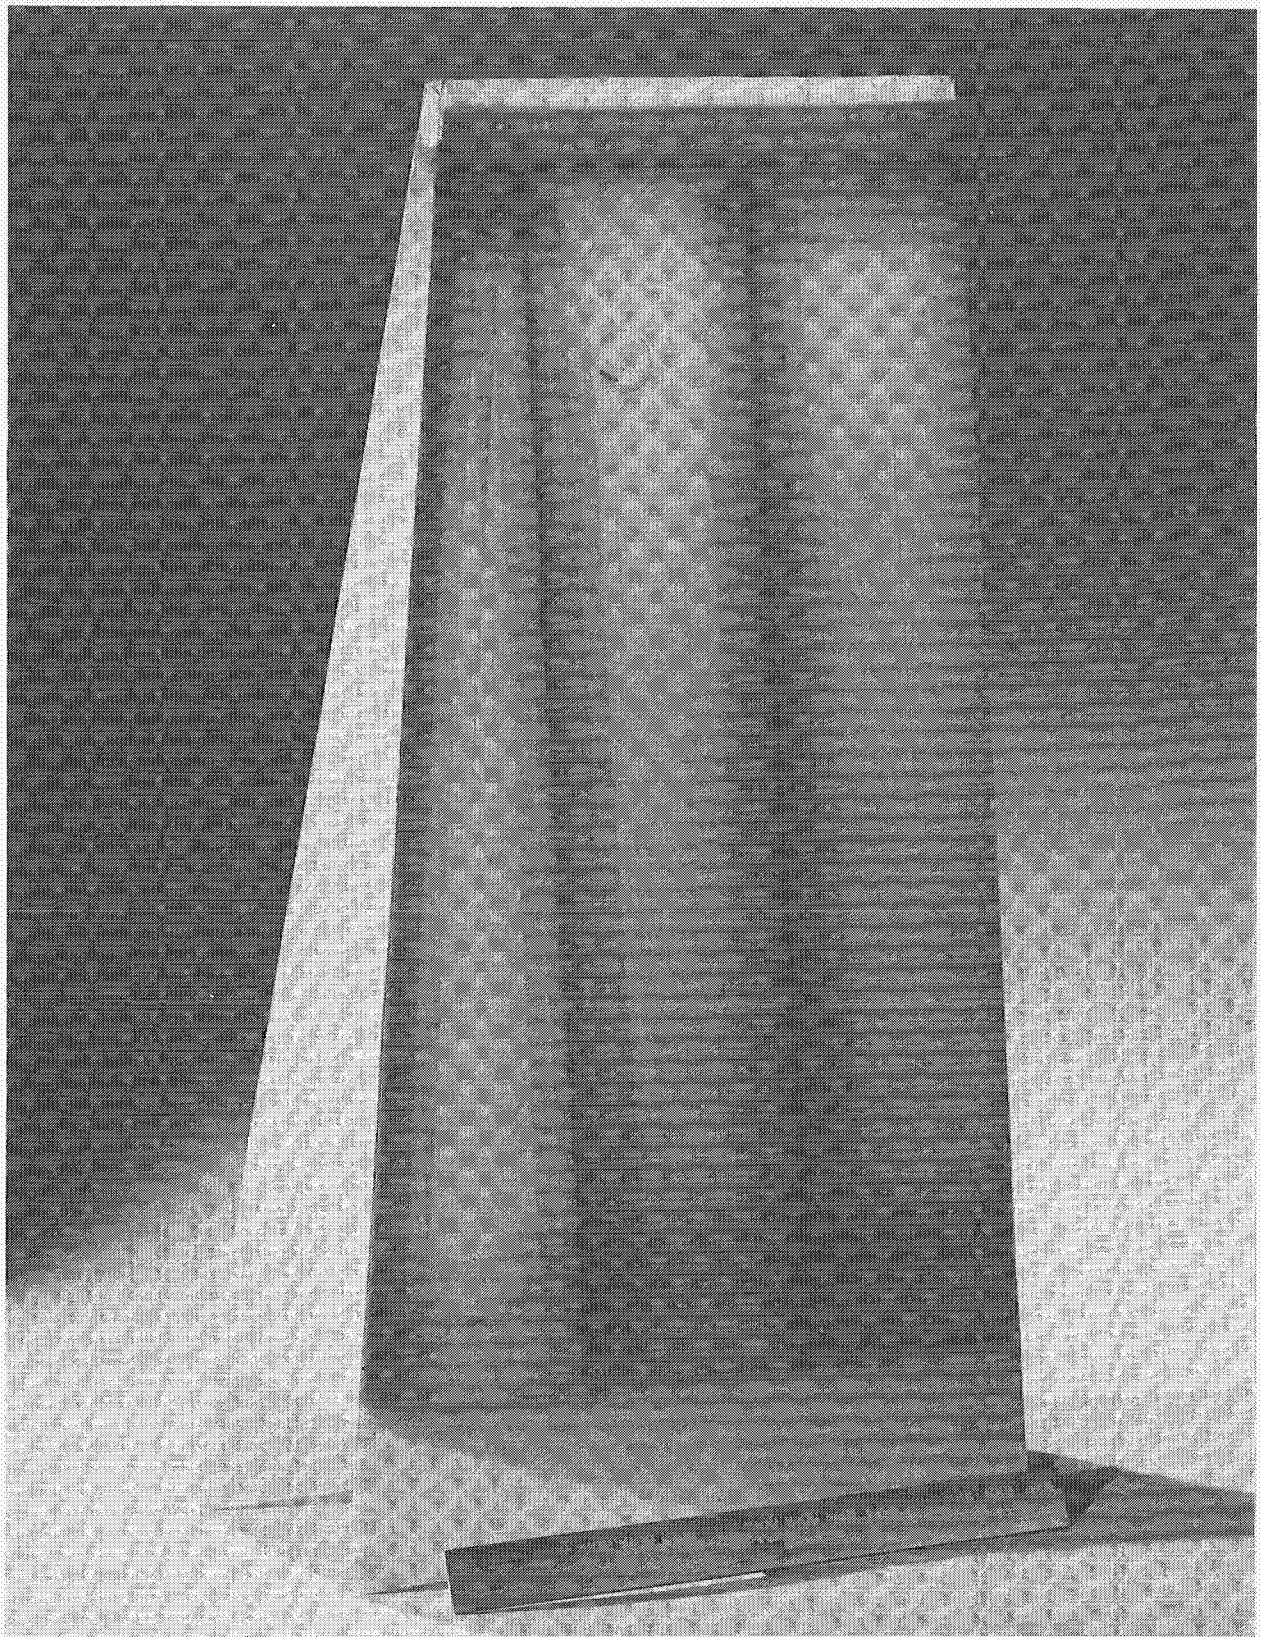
FIBERGLASS-EPOXY PROTOTYPE MOLDING ASSEMBLY
